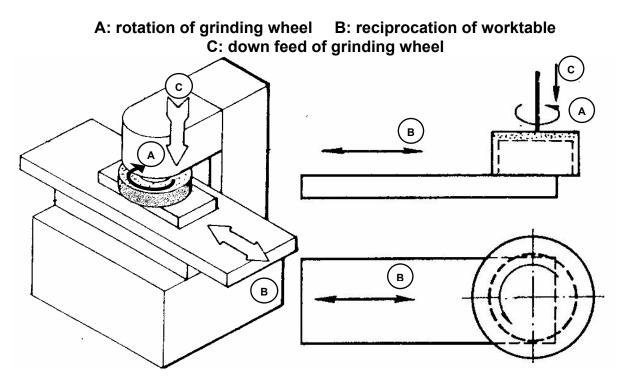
Vertical spindle reciprocating table surface grinder
